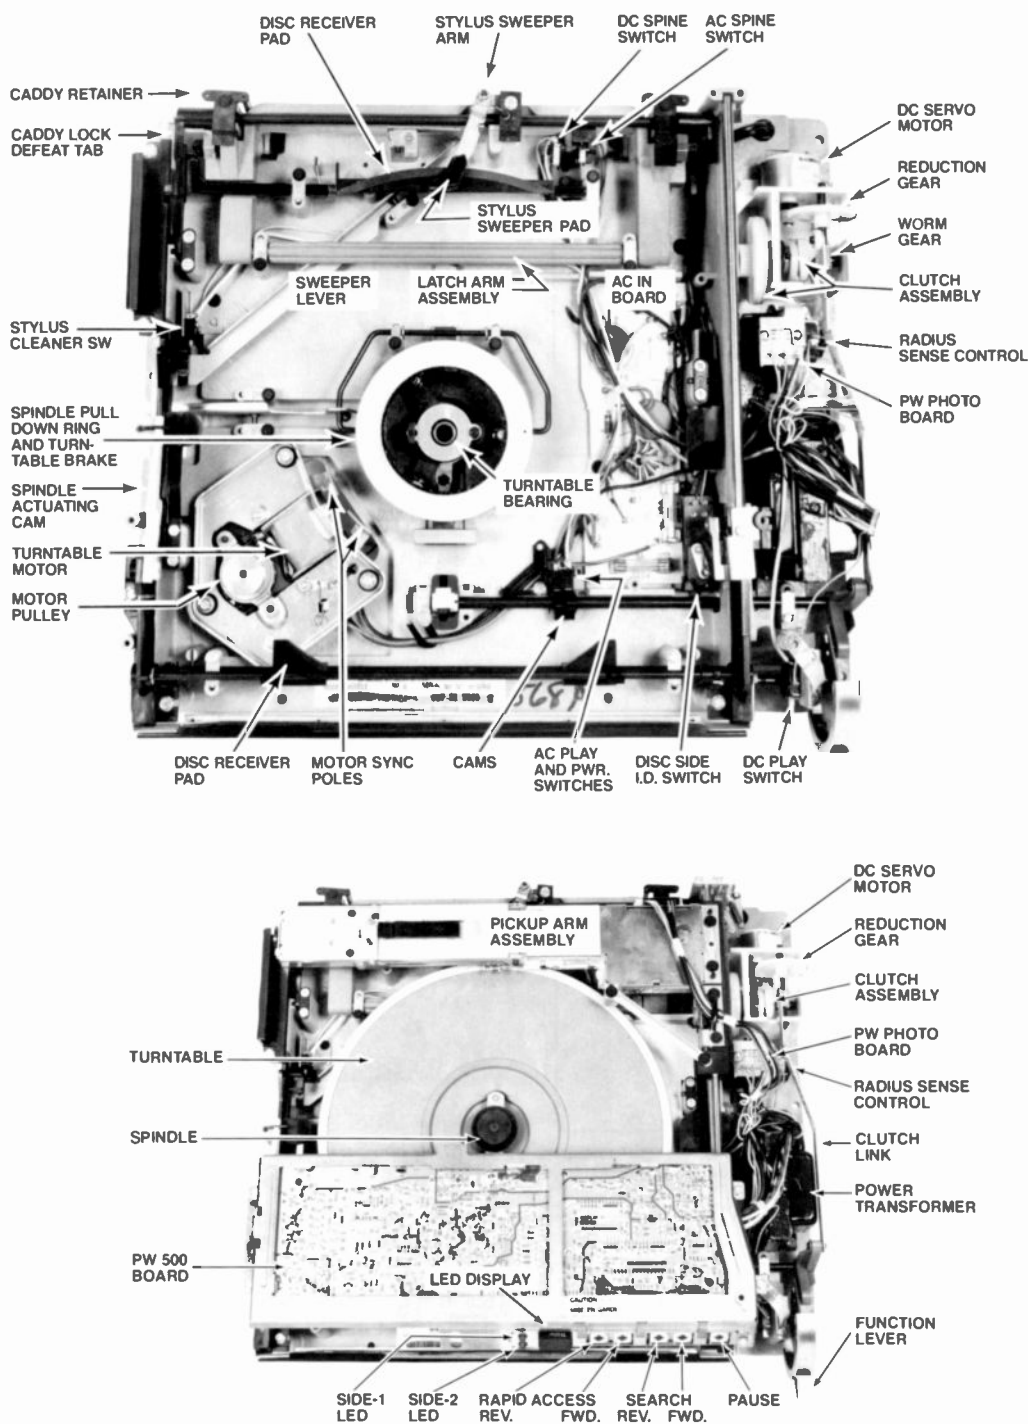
Top view of the VideoDisc player with the cabinet shell removed. The upper view also shows the control board (PW500), turntable, and pickup-arm assembly removed (for clarity).
